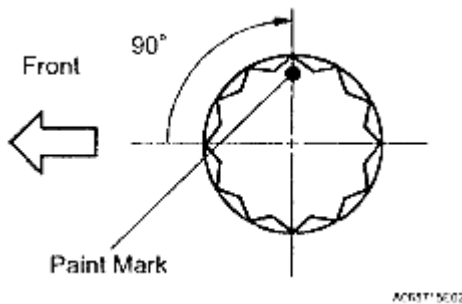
Identifying Mark Of Connecting Cap Bolts With Paint
